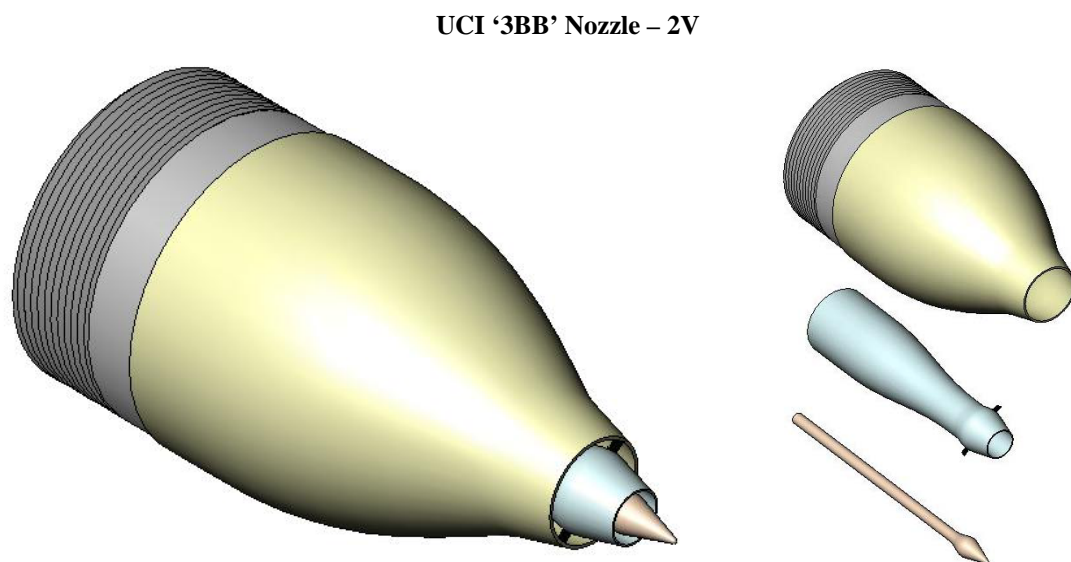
Solidworks model of entire assembly for the UCI '3BB' nozzle: threaded aluminum fitting, fan nozzle, core nozzle, one pair of vanes, and center plug.
